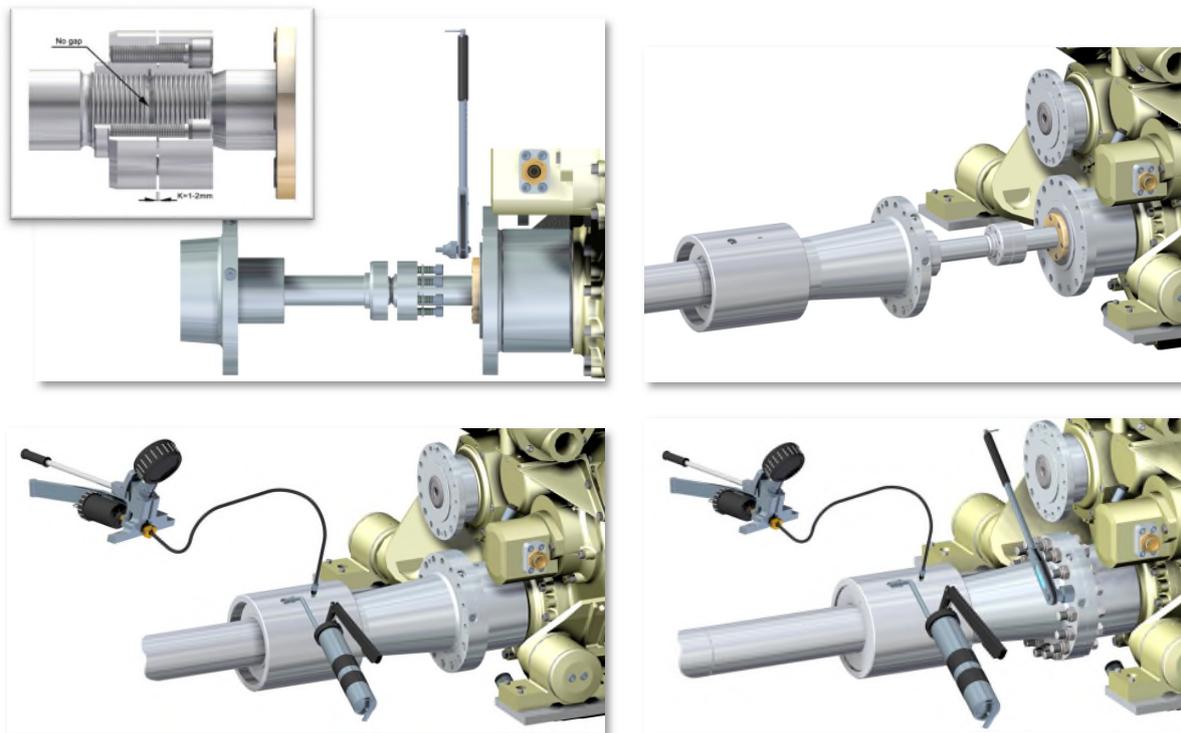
The picture above shows four stages of mounting the push pull rod and gear flange coupling.
